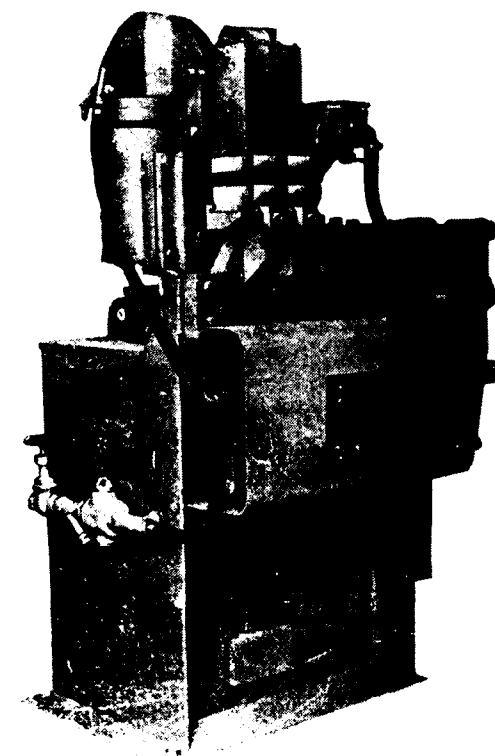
A. F. /1 Automatic Flash Butt Welder.
